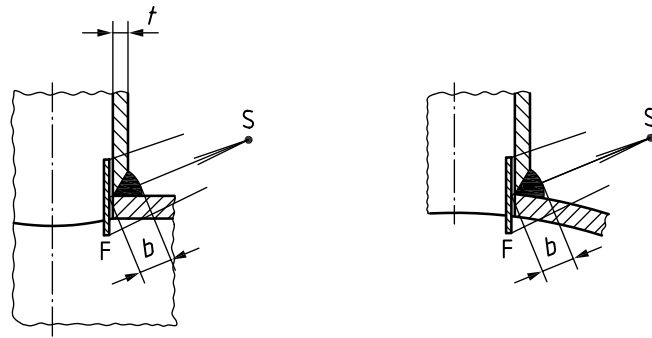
Arrangement for testing of set-on welds with the radiation source outside and the film inside
